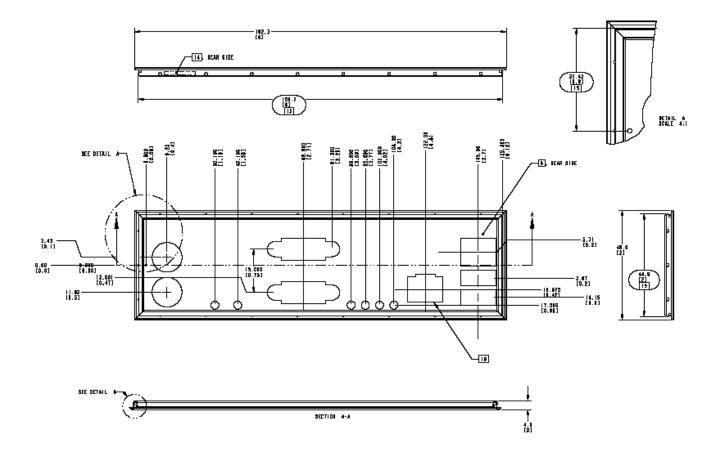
Pedestal Mount I/O Shield Mechanical Drawing for Intel $^{\ensuremath{\mathbb{R}}}$ Server Boards S3000AH and S3000AHLX
